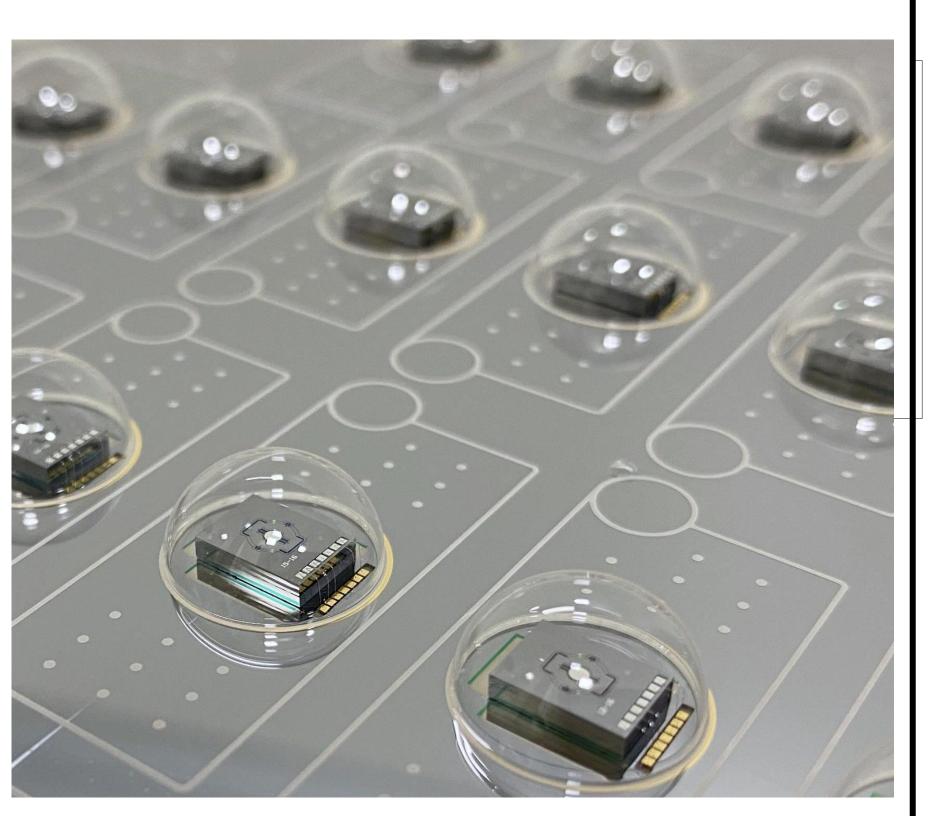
Completely assembled 8" wafer. Capping at wafer level.
